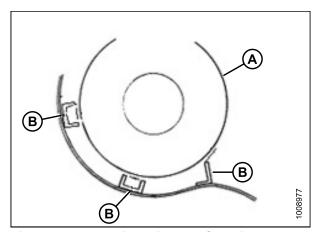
End View Diagram Showing Auger and Stripper Bars
